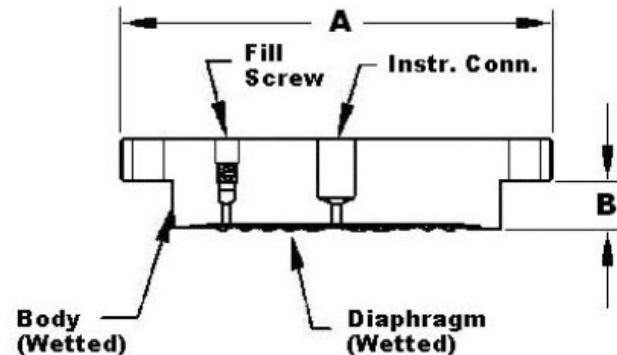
Seal Dimensions (Chemical TEE "Taylor Wedge" Seals)
